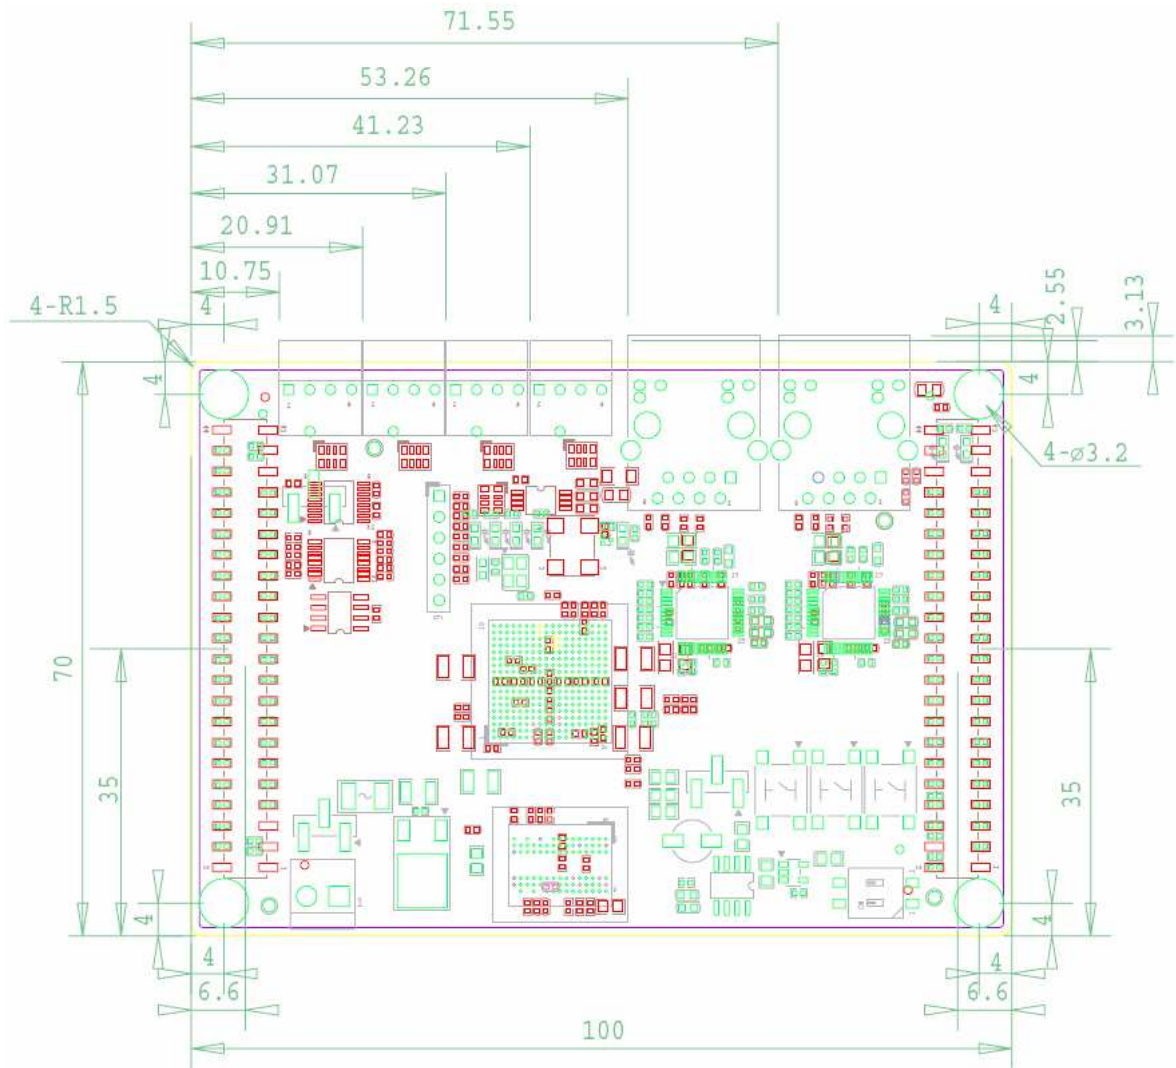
TB-6S-LX25-FANET Board Dimensions
